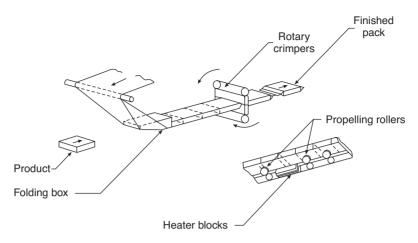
Horizontal form/fill/seal (f/f/s), flowpack type machine.
